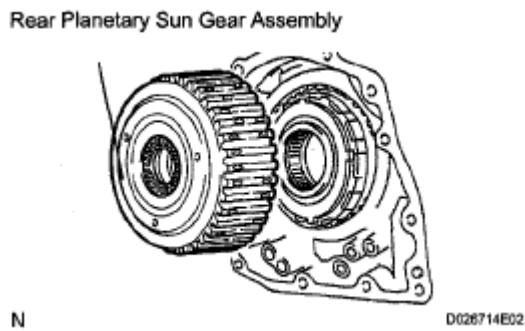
Identifying Rear Planetary Sun Gear Assembly
